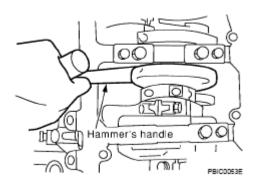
Identifying Crankshaft Pulley Bolts Using Hammer
